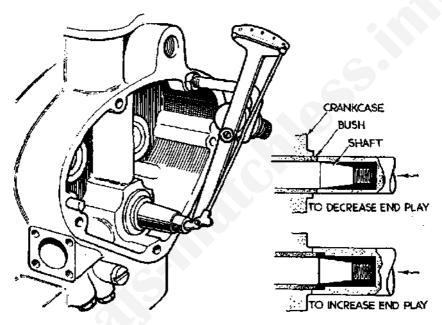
METHOD OF CHECKING AMOUNT OF MOVEMENT BETWEEN FLYWHEELS AND CRANKCASE.
